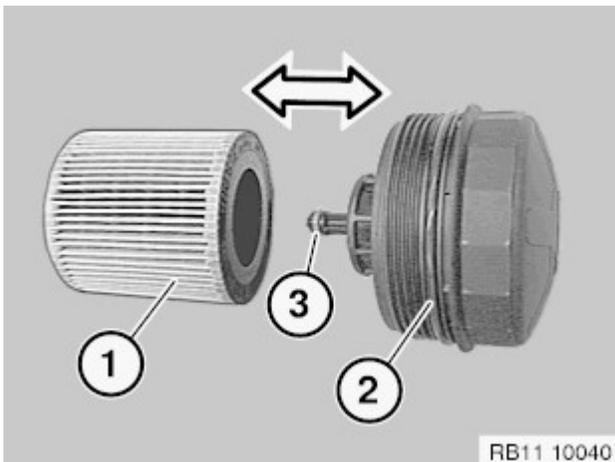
Identifying Oil Filter Element And Sealing Ring
